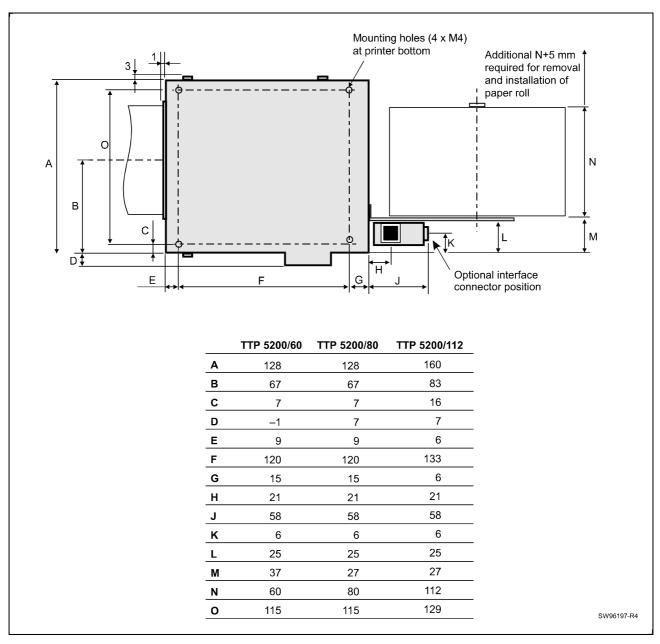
Top view. The dimensions in this drawing apply to all basic TTP 52XX models with up to 135 mm paper roll diameter.
